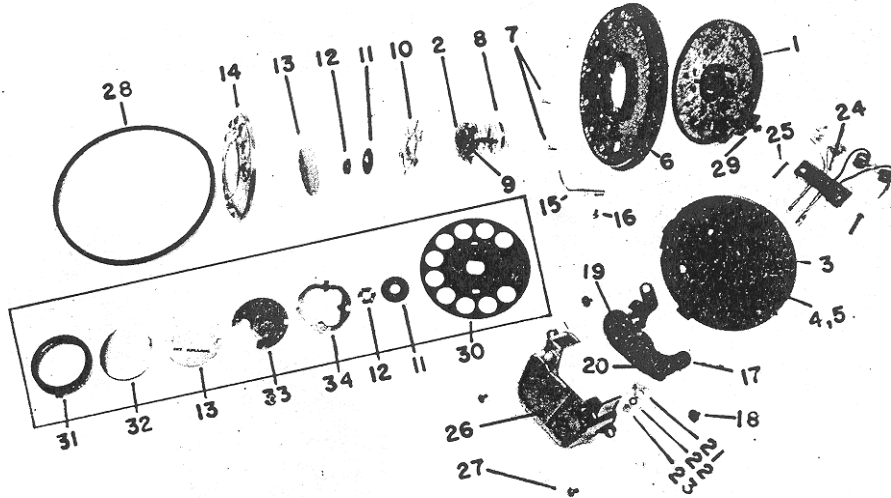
COMPONENT PARTS - EXPLODED VIEW (19-TYPE DIAL)
